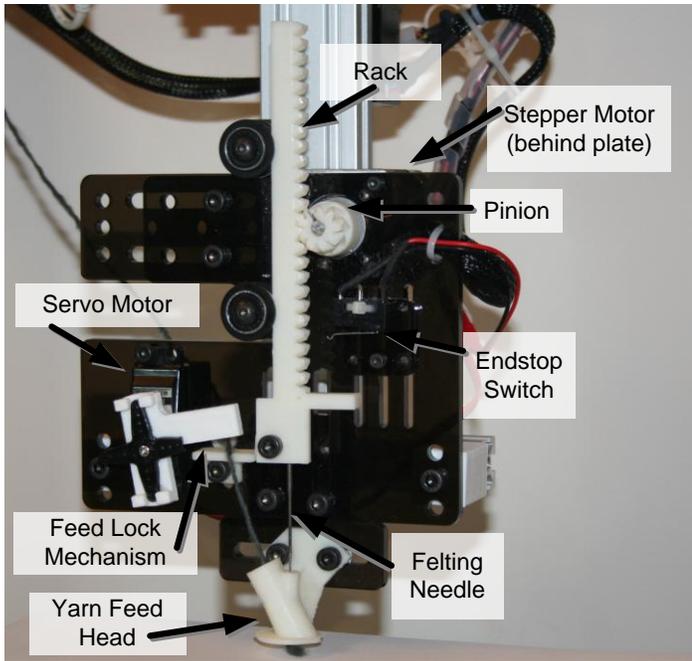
Needle Felting Print Head. The dark mounting plate is laser cut acrylic, while white parts are 3D-printed
